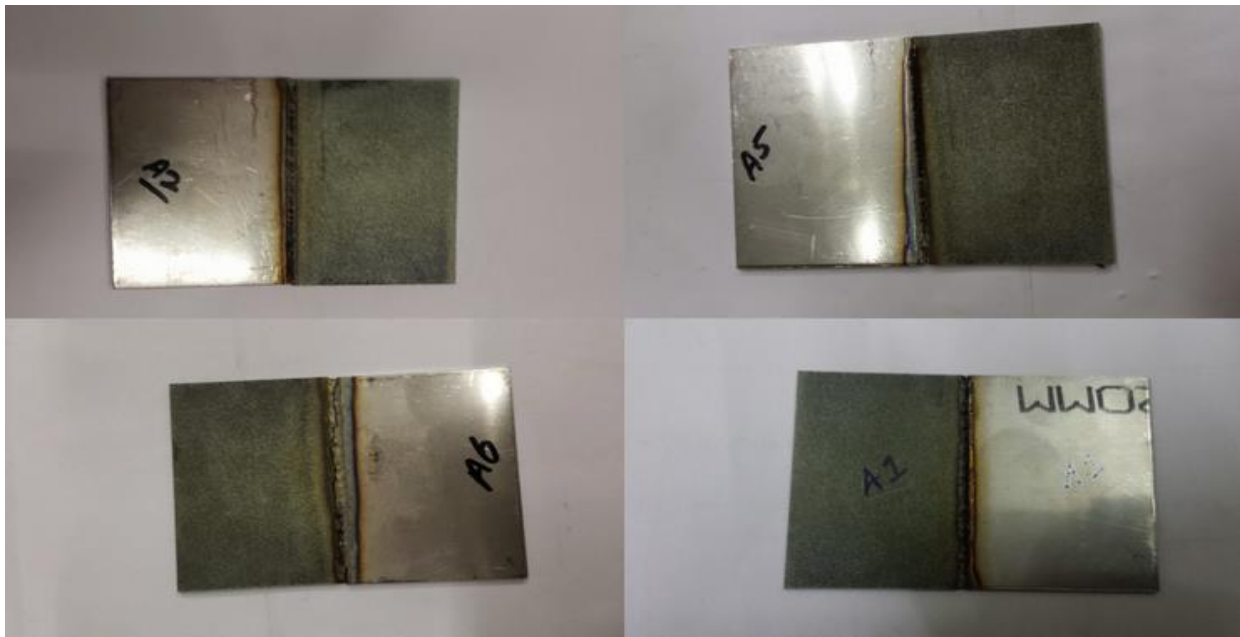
Laser welding of SS-Ti with Aluminium as filler
